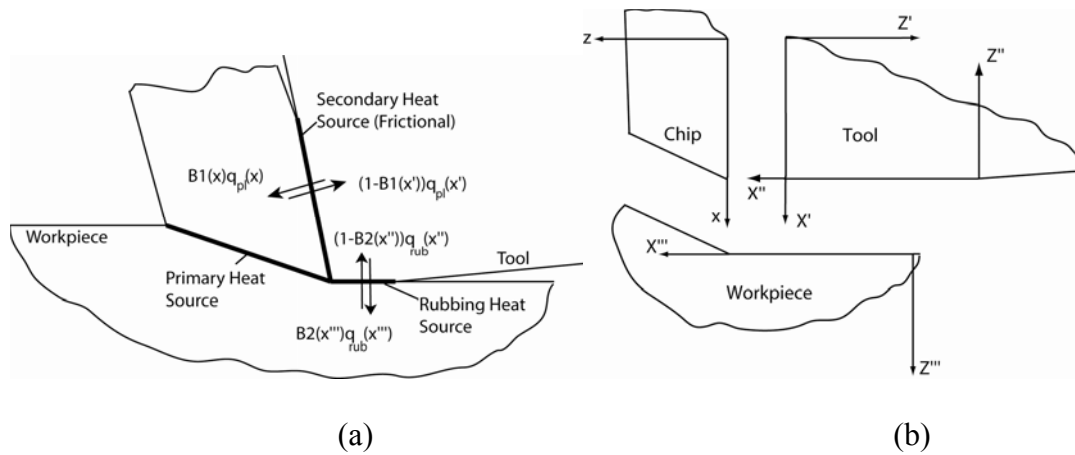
(a) Heat sources in worn tool thermal modeling and (b) coordinate systems for chip, tool and workpiece.
